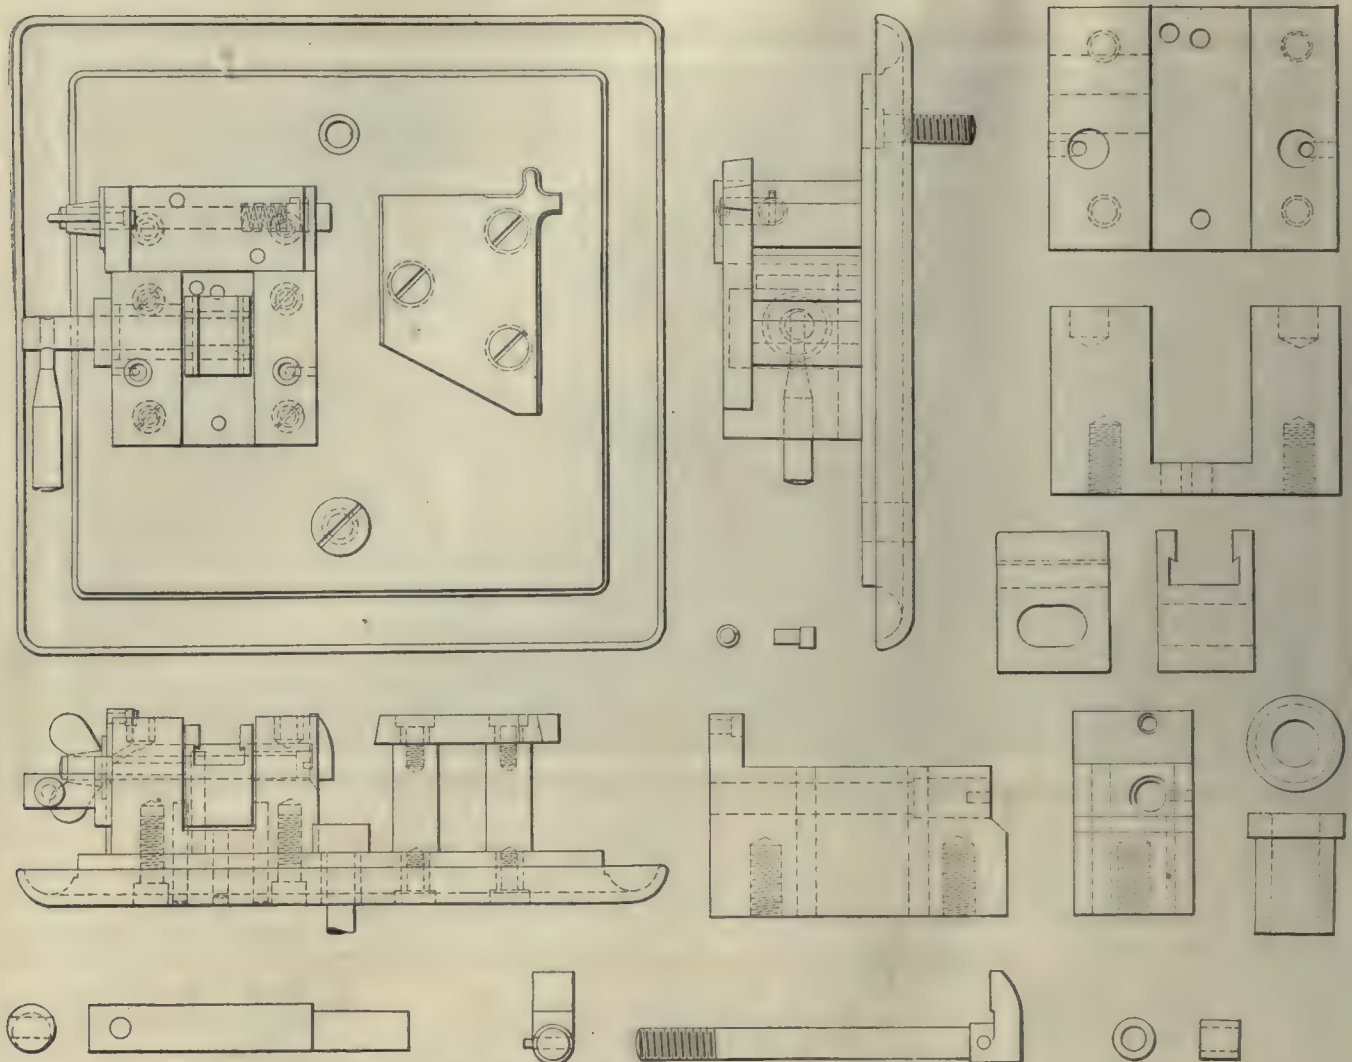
FIXTURE FOR PROFILING LOCKING LUG
